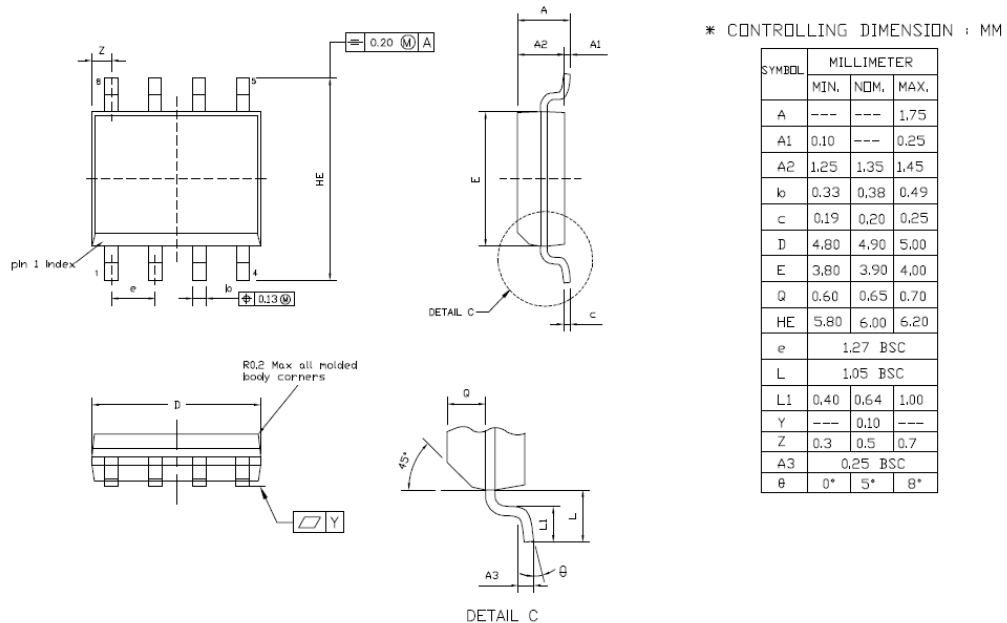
SOP8 Package Shape and Dimension in millimeters and (inches)
